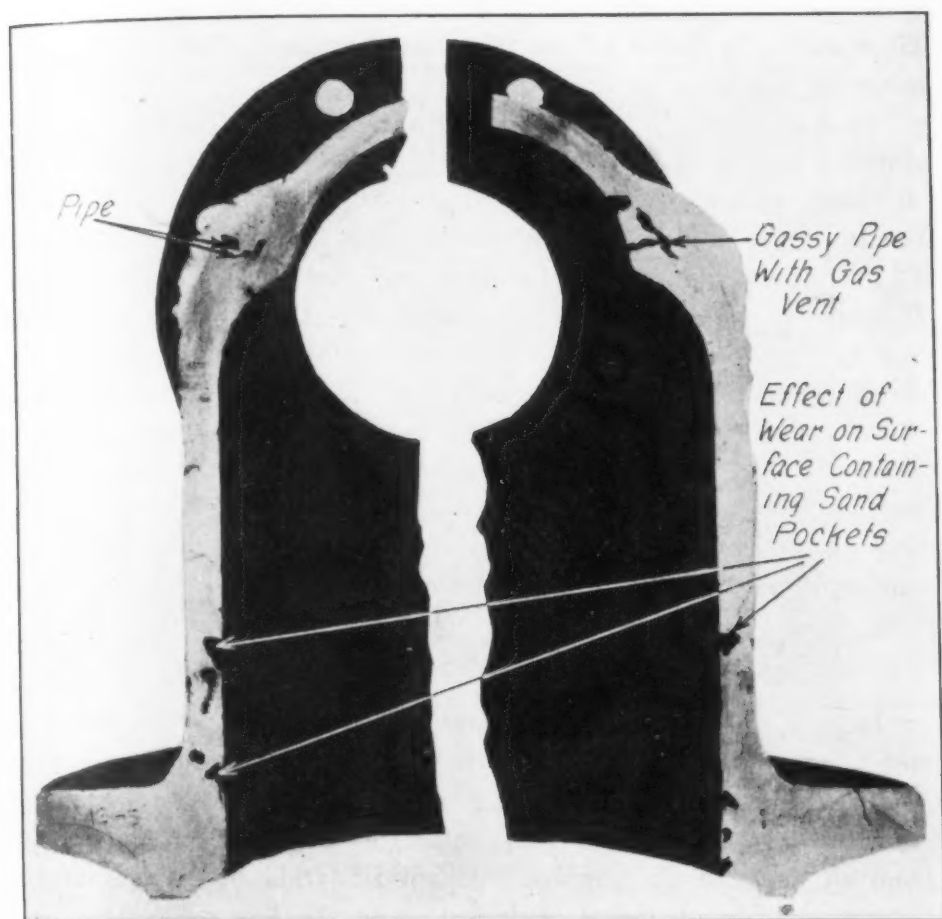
Photograph of Steel Casting Showing Effect of Wear in Places where Surface Sand Inclusions have Dropped out, Leaving Bad Surface Cavities.
